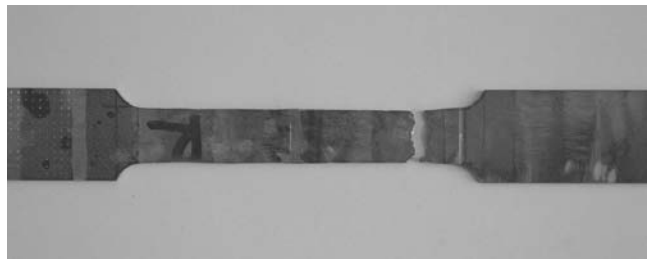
View of a repaired crack from the inner flap of nickel superalloy ZS-3DK (ЖС-3ДК), using HPDL laser welding, Table 4
